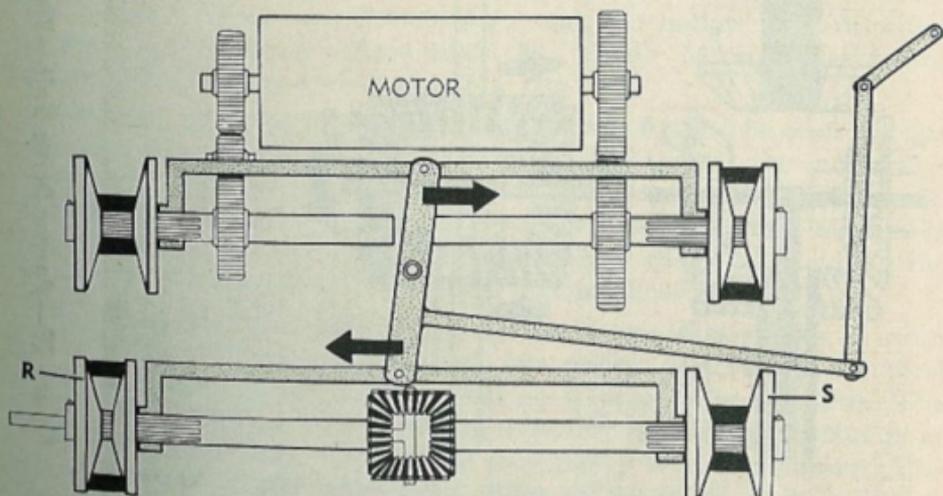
Power Drive Unit—Viewed From Bottom of Mount M45
